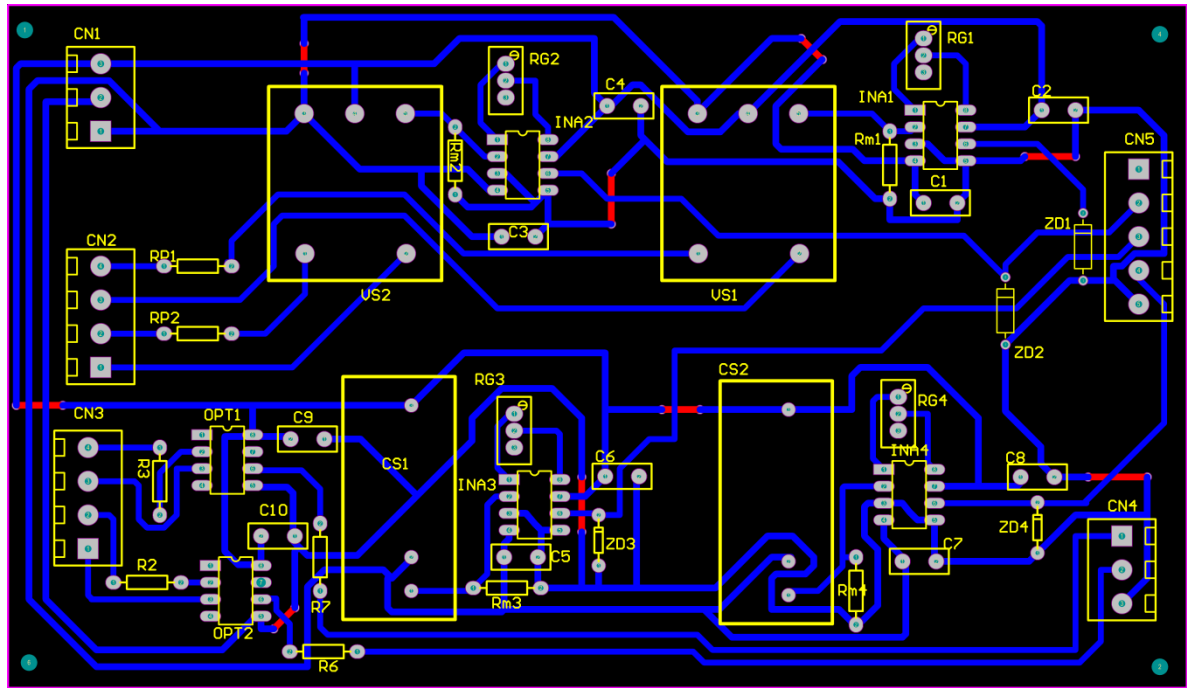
Layout drawing in Altium Designer software showing the four-channel PCB for the bidirectional dc-dc converter.
